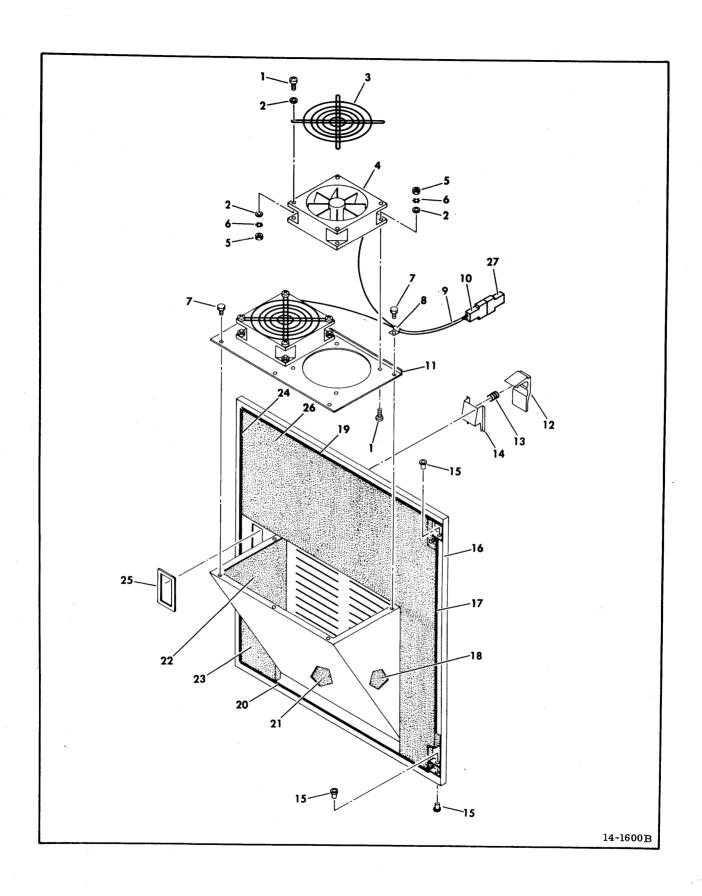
Rear Door Assembly - Acoustic Cabinet 83322150 W
